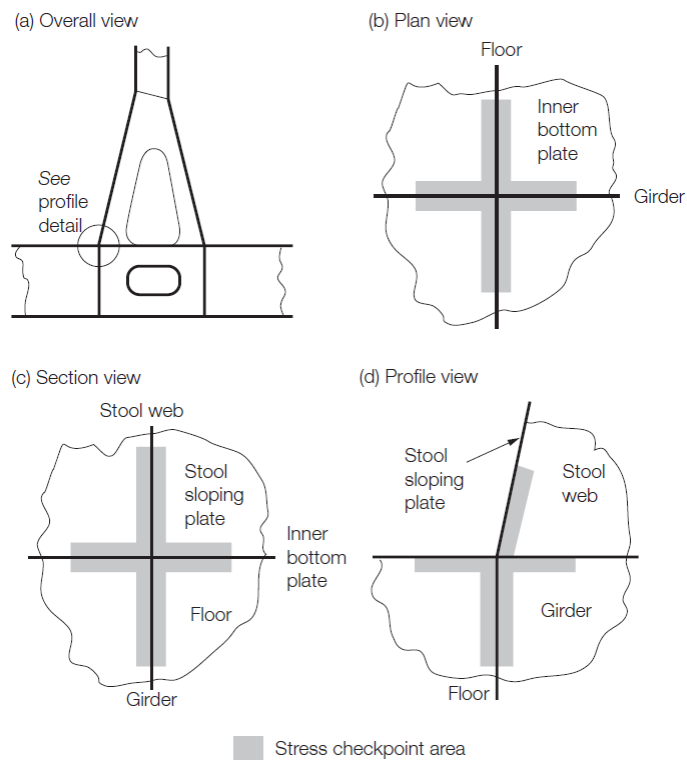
Bulkhead stool to inner bottom connection (ShipRight-3, 2004)
